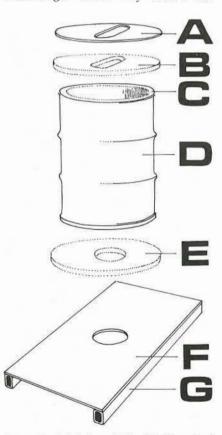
Exploded view of kiln. (A) lid made of sheet or plate steel. Pots are lifted into the kiln through the oval hole, which acts also as the burner exhaust. (B) ceramic fibre lid-lining with oval hole to match lid's. (C) ceramic fibre lining. (D) kiln body, a discarded 12.5 gallon oil drum. (E) ceramic fibre bottom-lining with hole for burner port. (F) bottom made of plate steel. The round hole is a port for an updraft potburner. (G) stiffener to prevent warping of bottom during firing.
